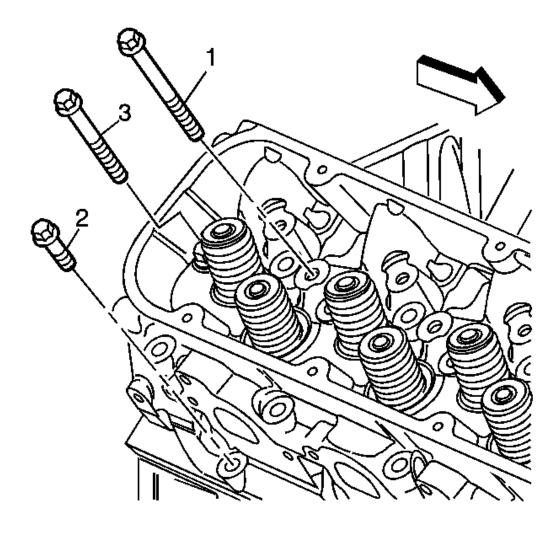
View Of Right Cylinder Head Bolts Courtesy of GENERAL MOTORS CORP.
